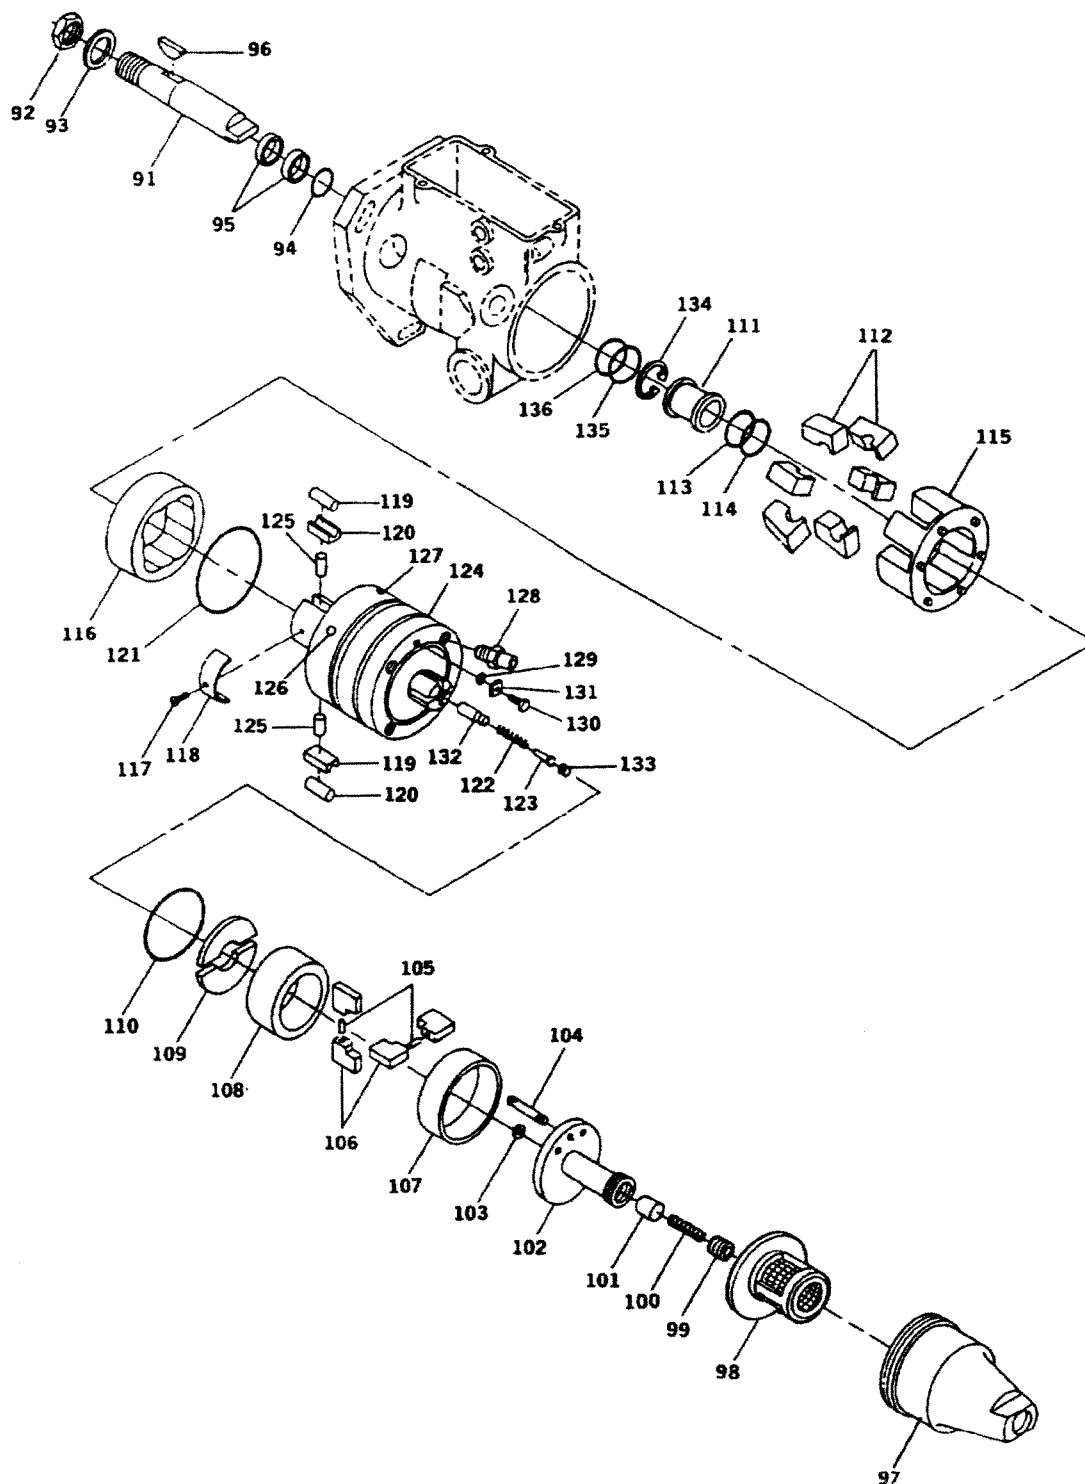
Fuel Injection Pump (Sheet 2 of 2)
